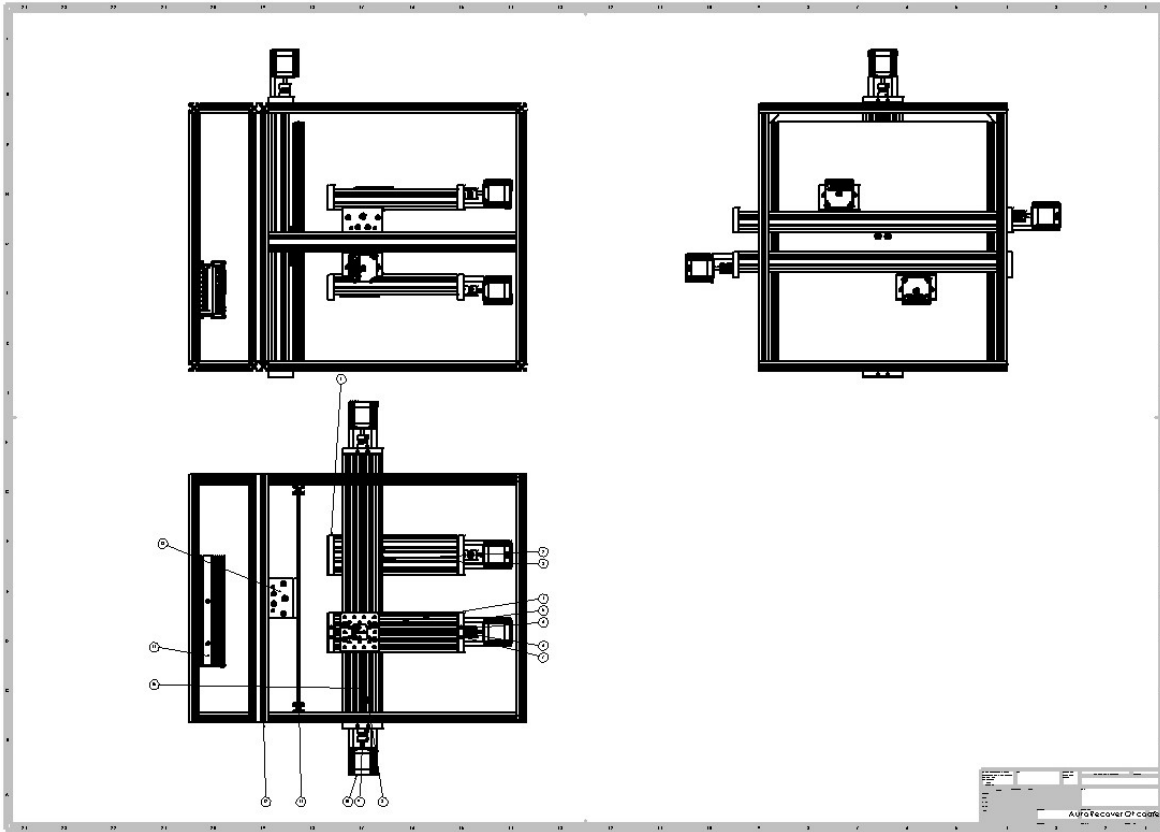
The three projections of the assembled CNC machine overview.
